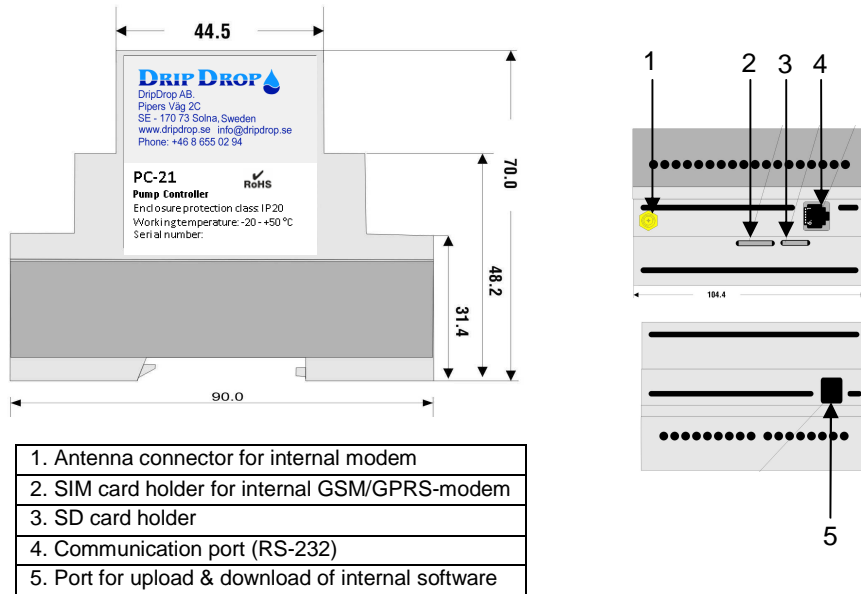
shows the units side view with main dimensions. It also shows the unit from above with the SIM and SD cards slot, the RS 232 port and antenna connector. The lower view of the device shows the lower row of connecting terminals as well as the programming port.
